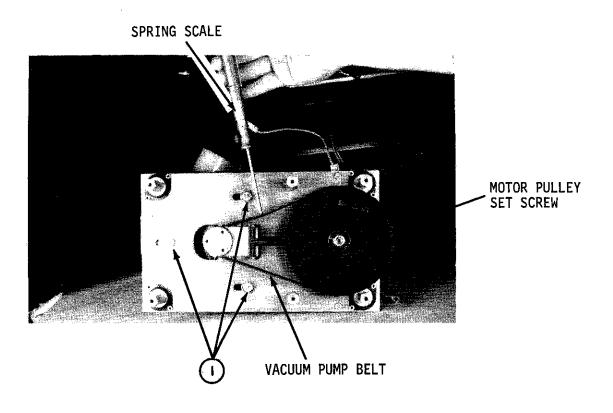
Adjustment of Vacuum Blower Motor Belt Tension
